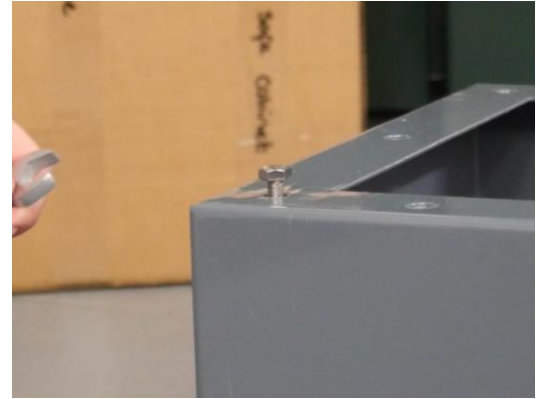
M8 Hex Head screw used to clean out the threads prior to fitting the shear-bolts.
